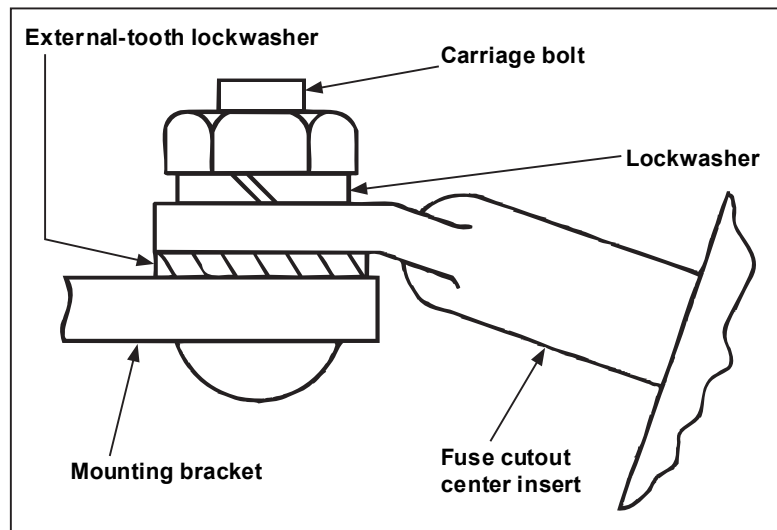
Detail of attachment of fuse cutout to mounting bracket.
